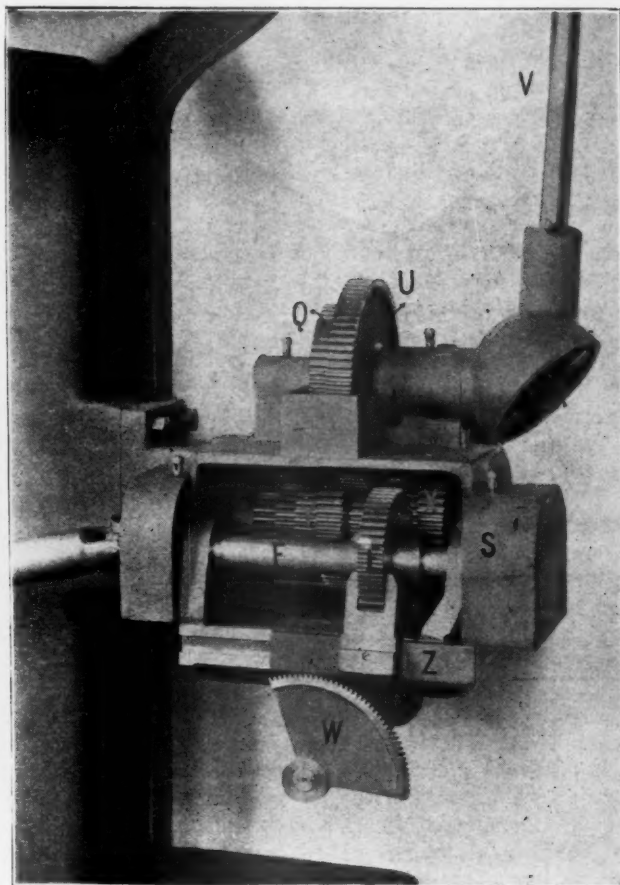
REAR VIEW OF LOWER GEAR BOX.
